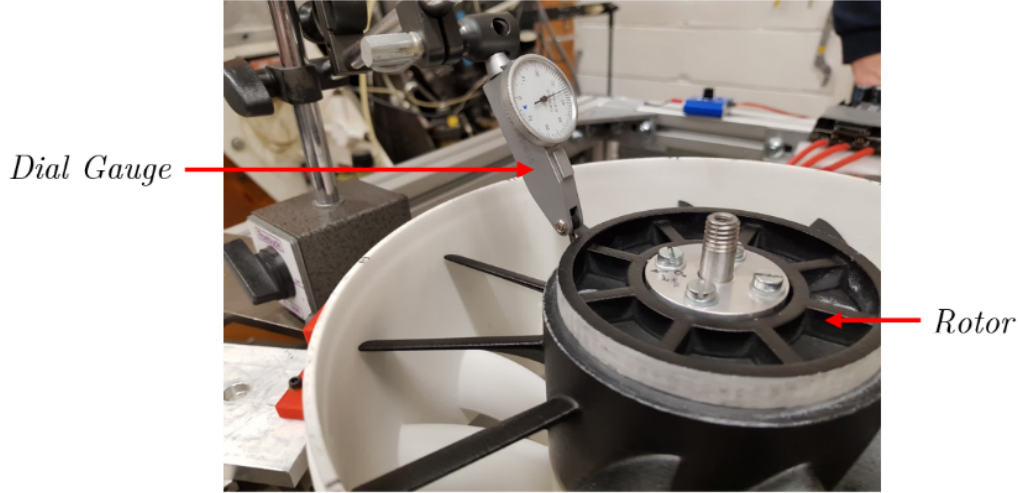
Dial gauge used to clock the assembled motor and rotor to the inside of the stator section
